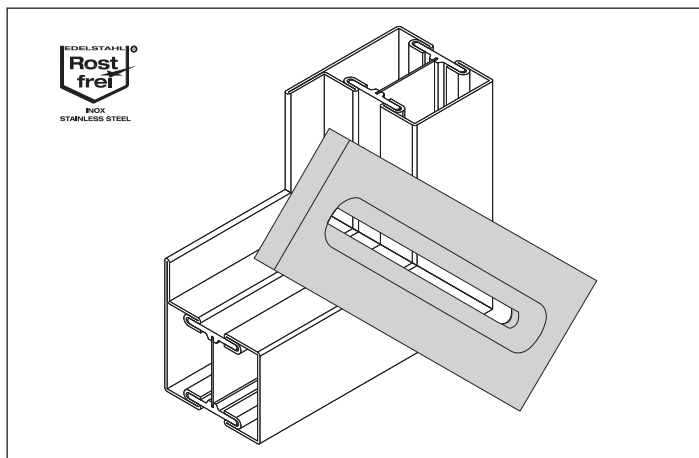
Use the copper welding gauge on the inside of the profile in the mitre area
